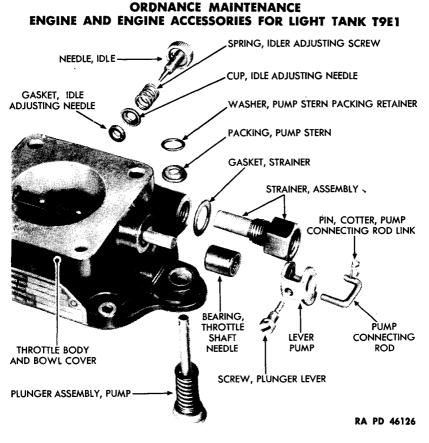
Throttle Shaft and Stop Assembly, Disassembled (Pump End)
